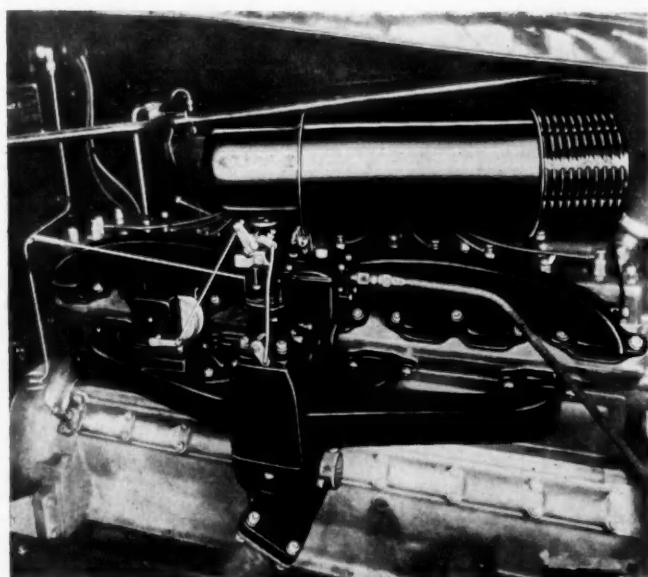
BENDIX-STROMBERG CARBURETOR AND AUTOMATIC CHOKE-CONTROL ON PACKARD-EIGHT ENGINE
